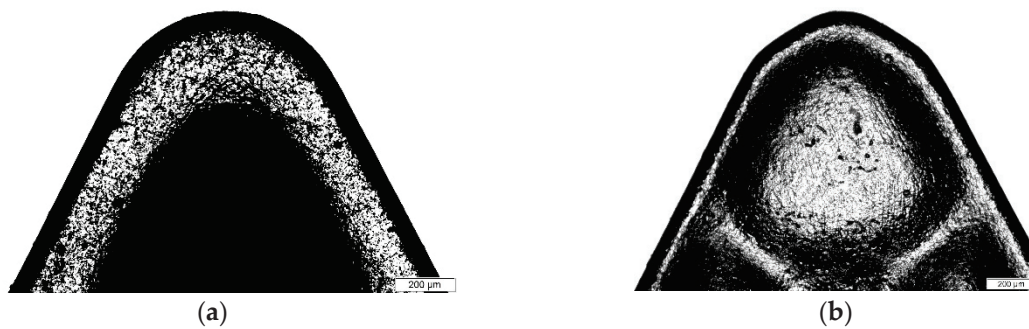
Optical microscope images of edge geometry: (a) conventional insert (b) wiper insert [7].
